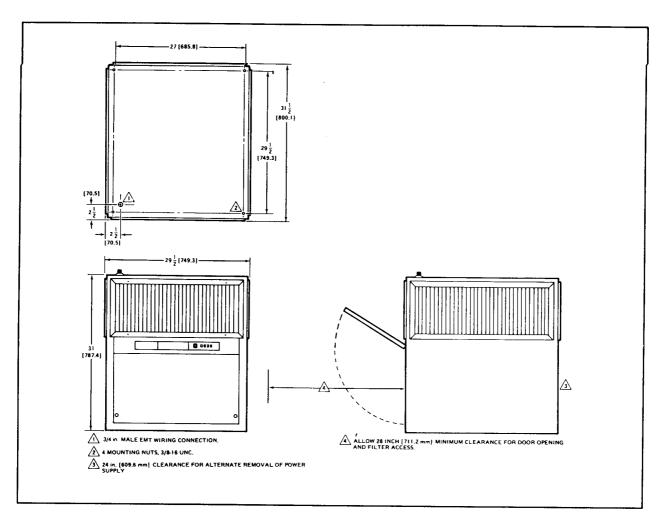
F62B DIMENSIONS IN INCHES (mm SHOWN IN BRACKETS)
